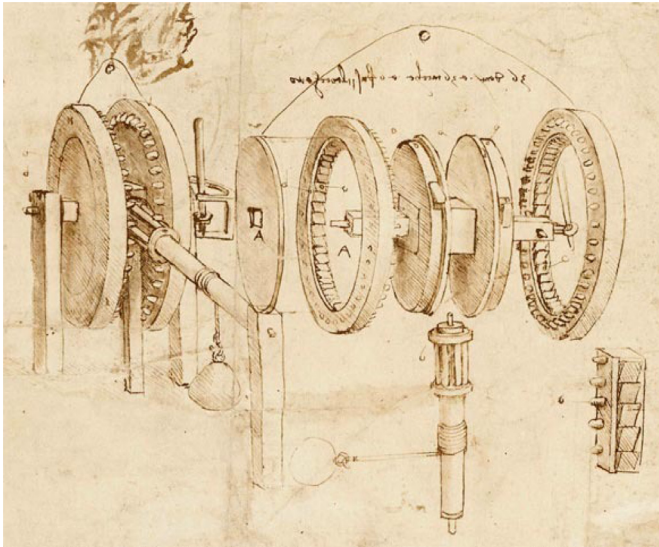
Exploded view of a gear assembly, taken from Leonardo da Vinci's Codex Atlanticus. This is one of the earliest examples of an exploded view diagram.
